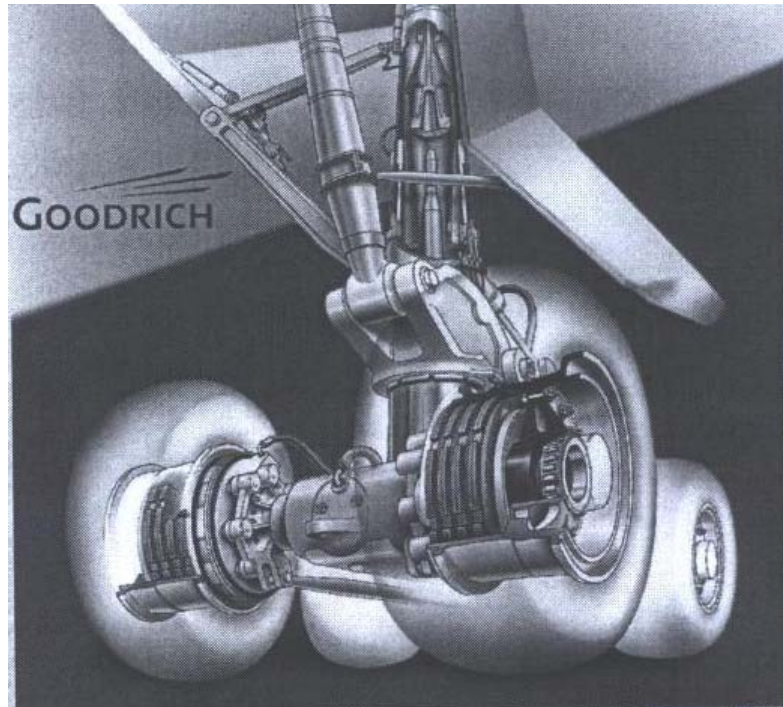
A typical Goodrich aircraft wheel assembly [2]
